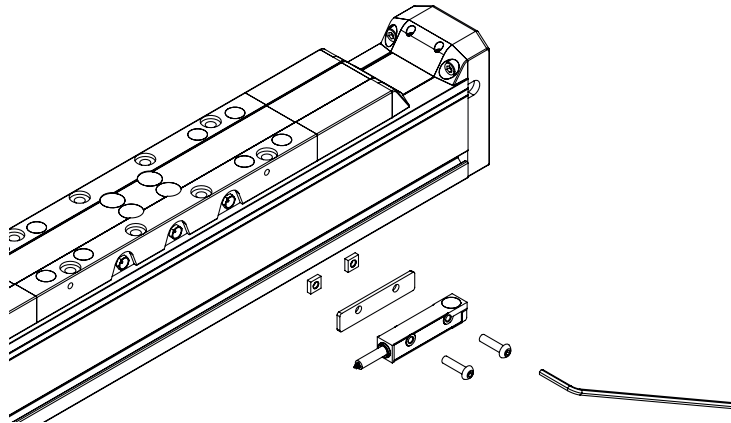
Mounting the limit switch: HM040S, HT100S
